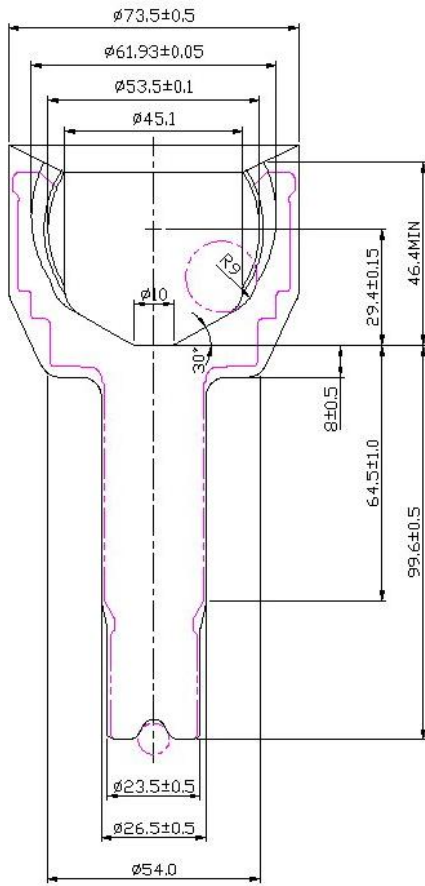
Layout and detail dimensions of target geometry for outer race of CV joint (unit : mm)
